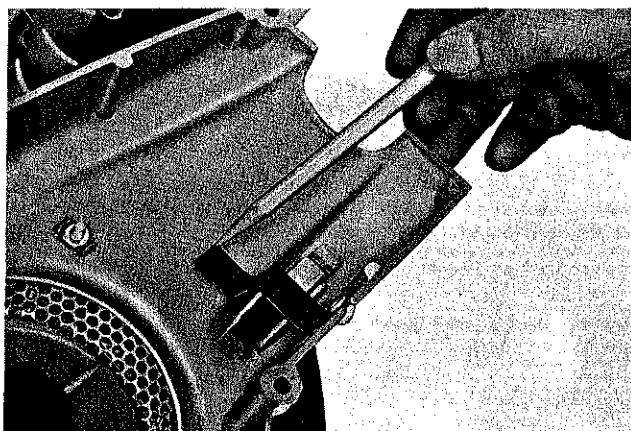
This metal strip may be bent to a position where it will contact the coil primary connector when moved to the "off" or grounding position.
